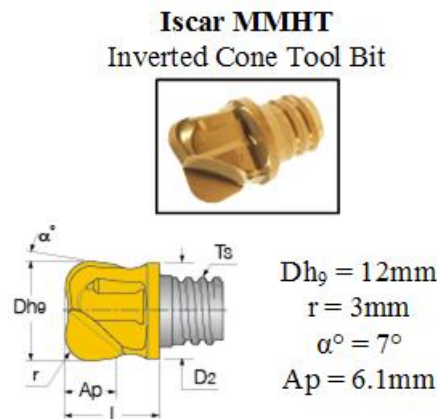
Inverted cone bull end mill tool (ISCAR MMHT) geometrical parameters
